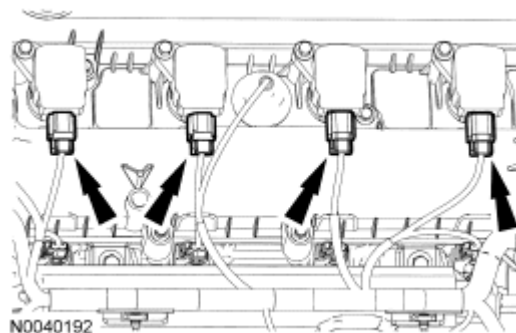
Locating Coil-On-Plug Electrical Connectors
